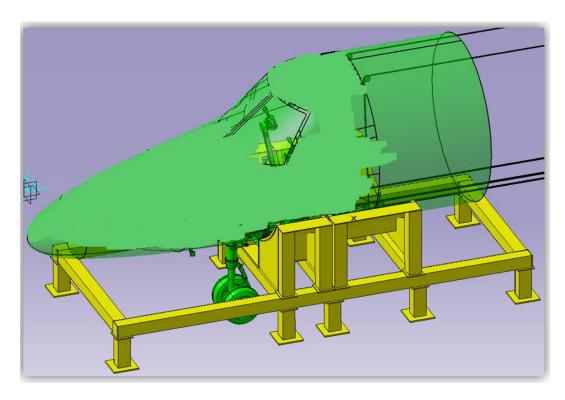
A: Assembly of Front fuselage of the aircraft on the Support Frame Sub-assembly (Other details are not shown for clarity)
